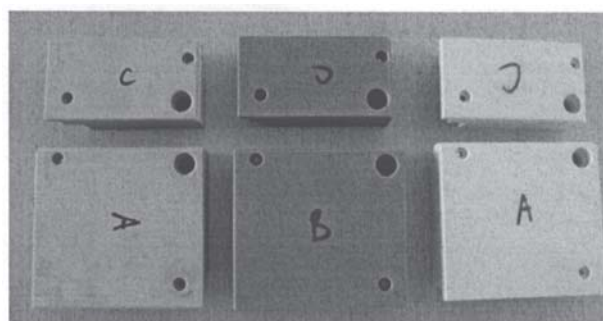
Connector blocks (material RAKU TOOL 1404, SIKA M940 and RIM 624)
